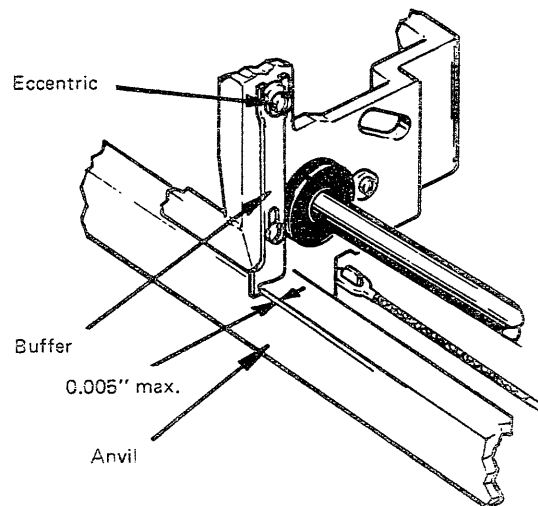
Carrier Buffers (767 Printer, Level 1)
